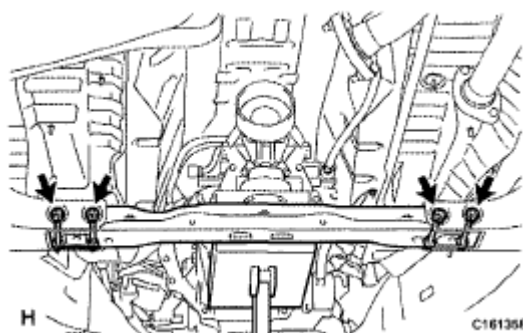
Identifying Nuts, Washers, Bolts And Frame Crossmember
